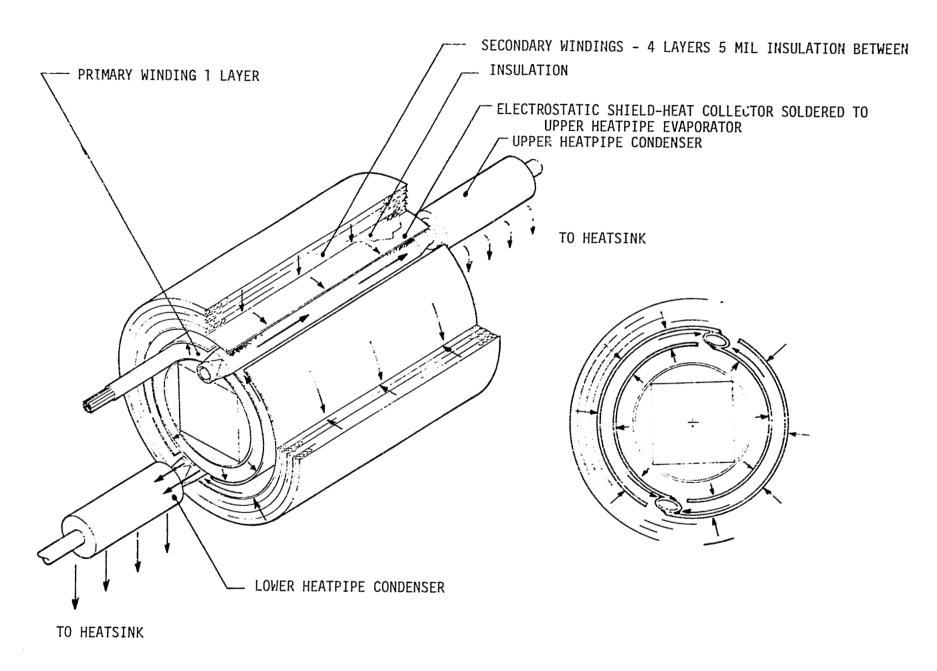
HEATPIPE COOLED TRANSFORMER HEAT FLOW PATHS
